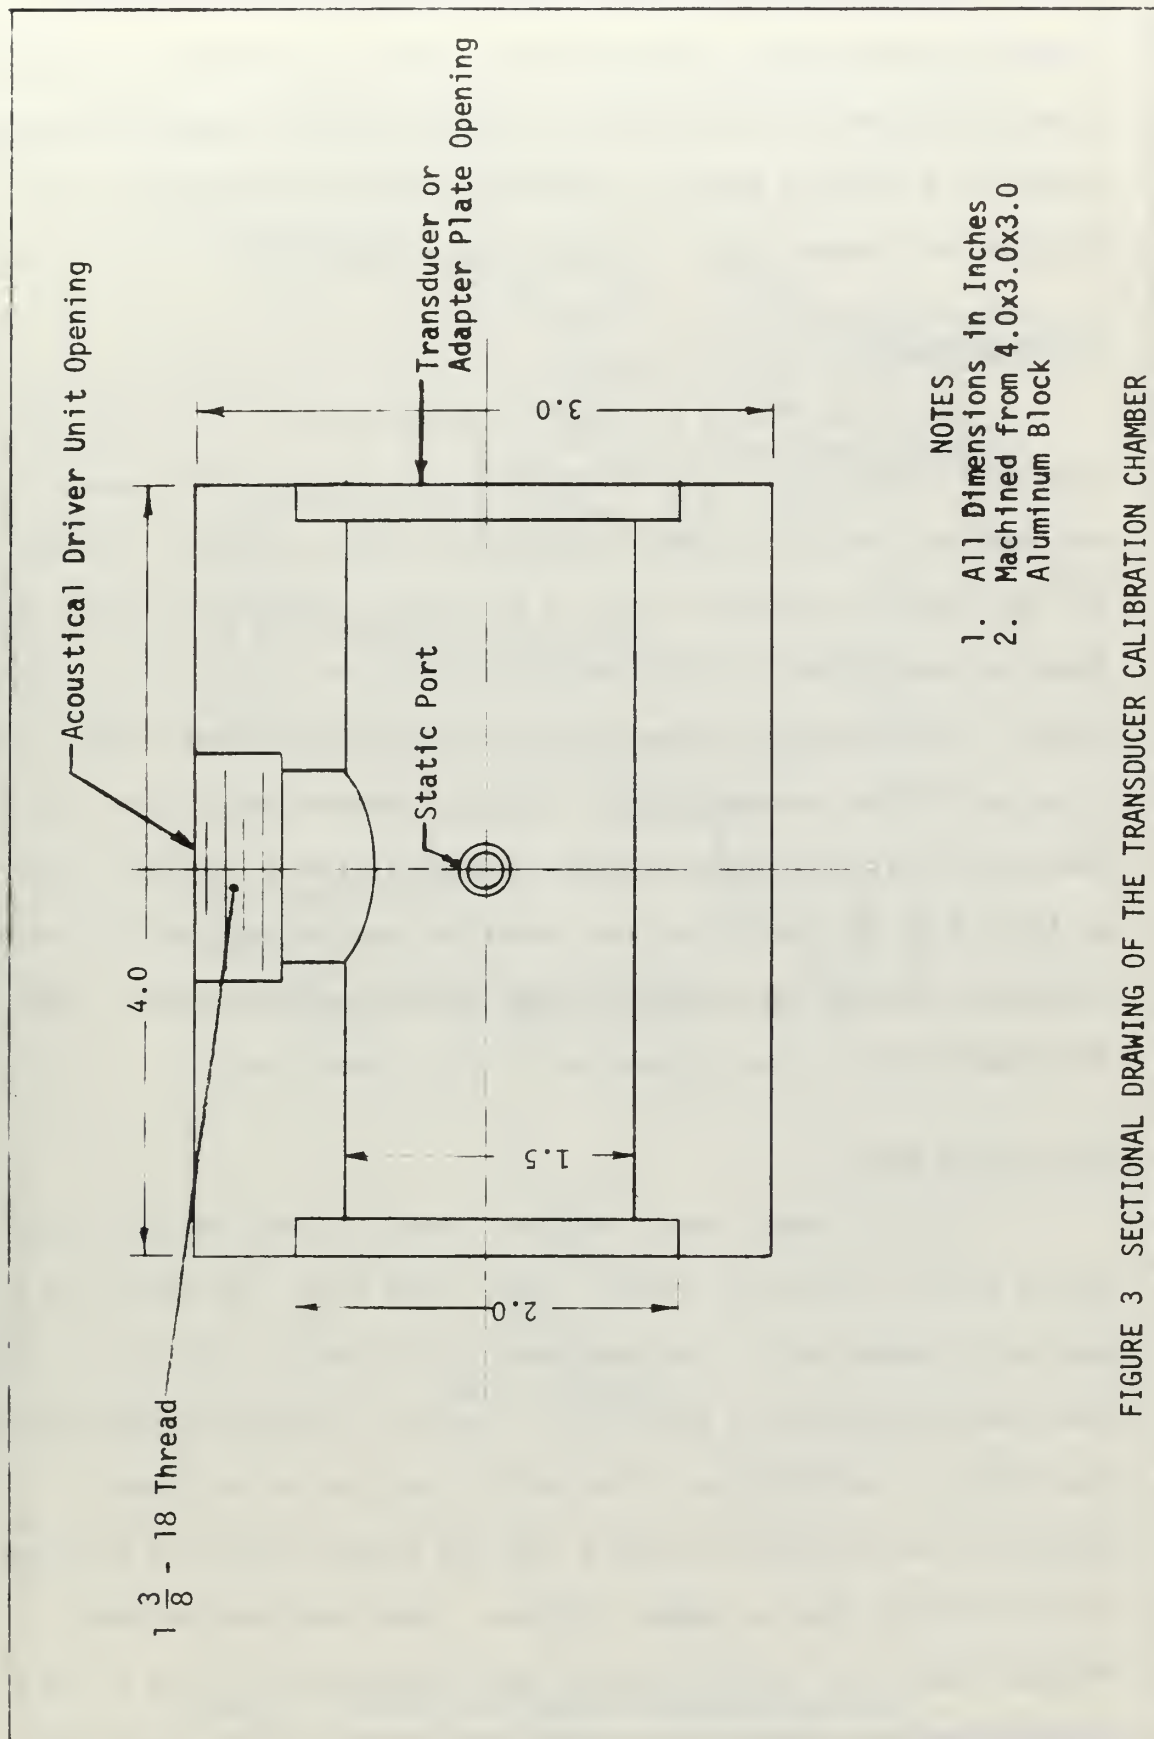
SECTIONAL DRAWING OF THE TRANSDUCER CALIBRATION CHAMBER
